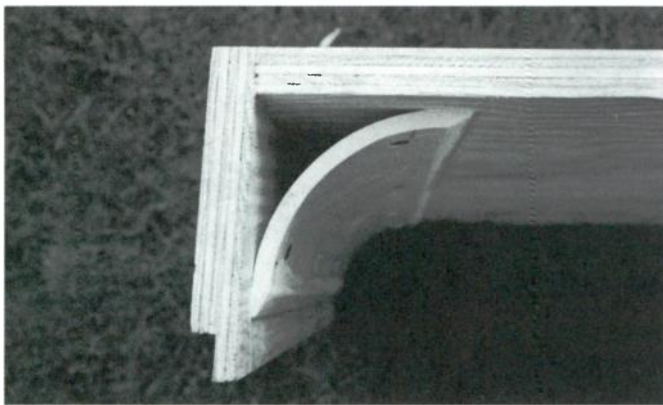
Detail of lower reflector; note chamfered edges and dado of bottom piece.
